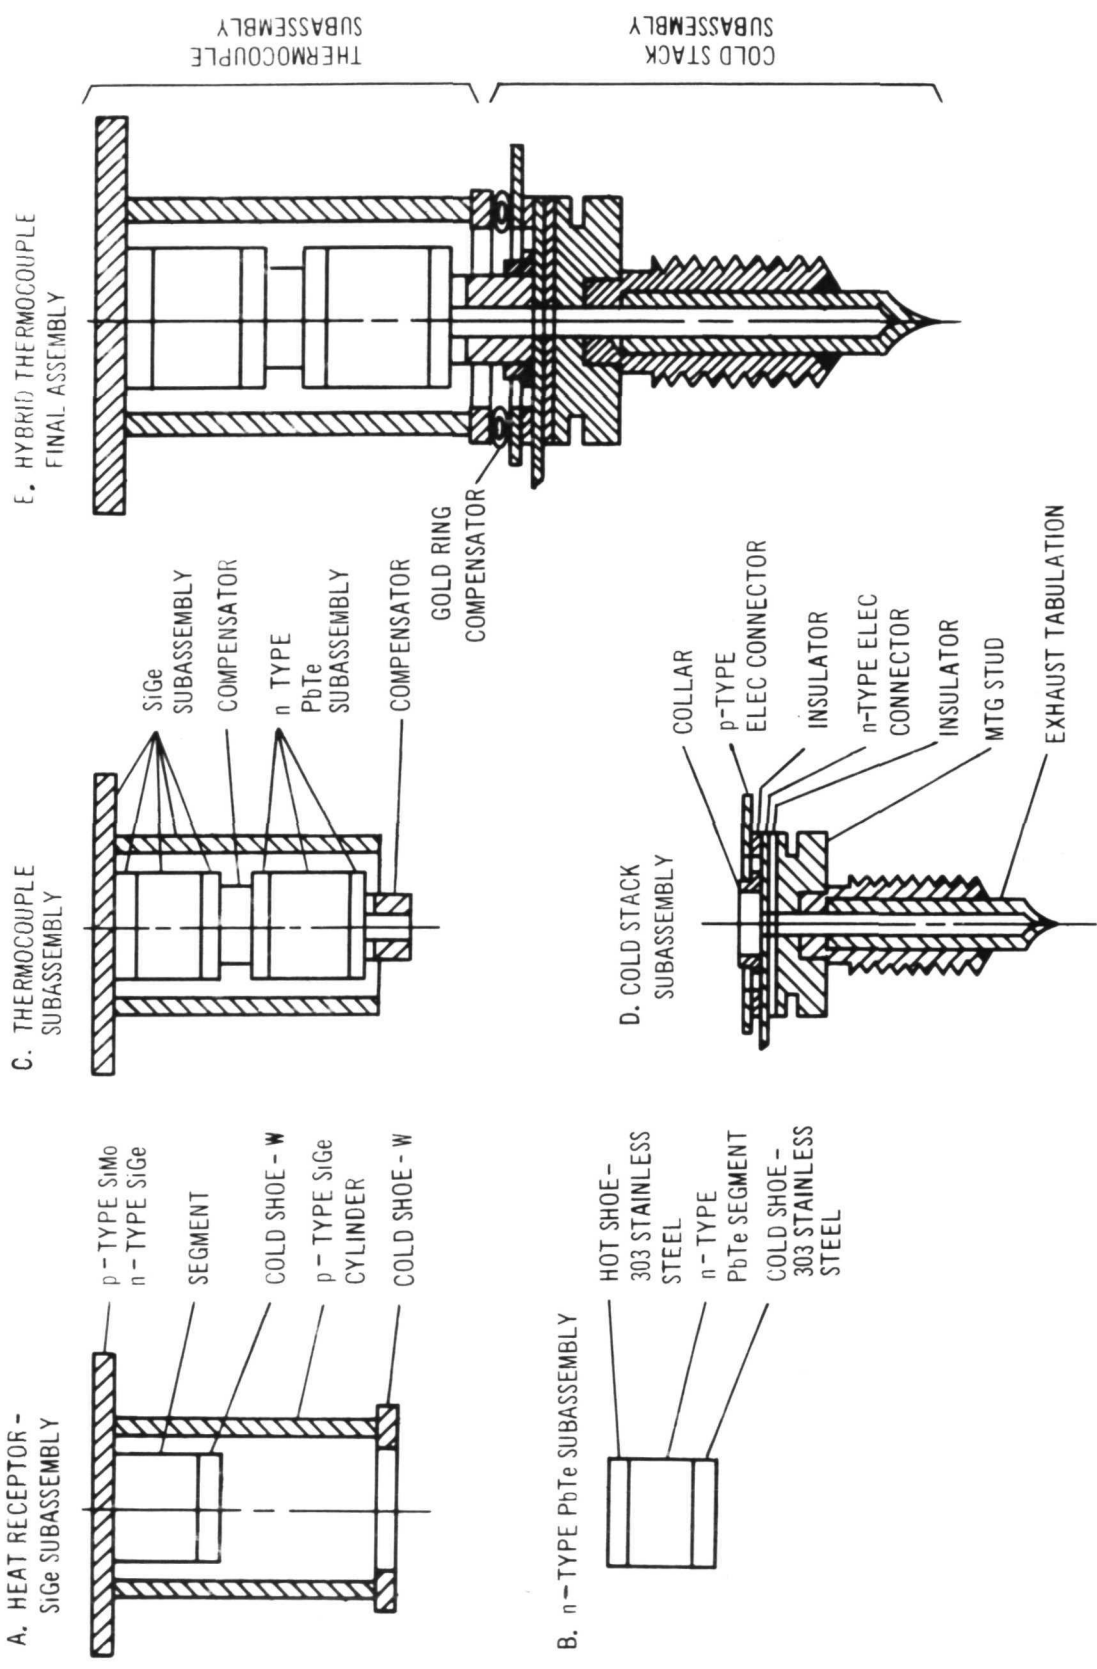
Hybrid Thermocouple Assembly Sequence - C
